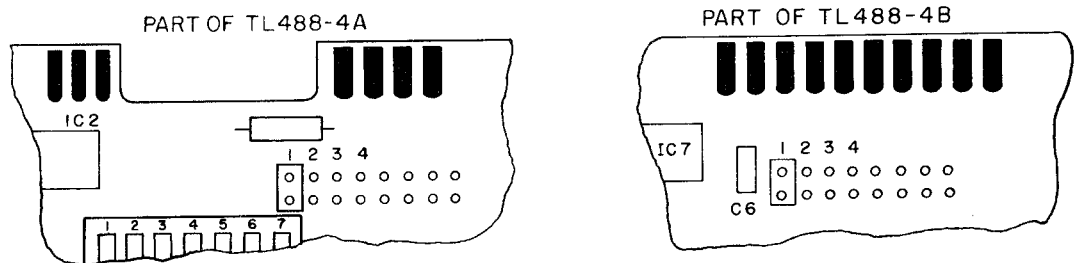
VIEW OF TL 488-4A. (LEFT) AND TL 488-4B (RIGHT) WITH BOARD ADDRESS SELECTOR DETAIL. JUMPER IN POS. 1.
